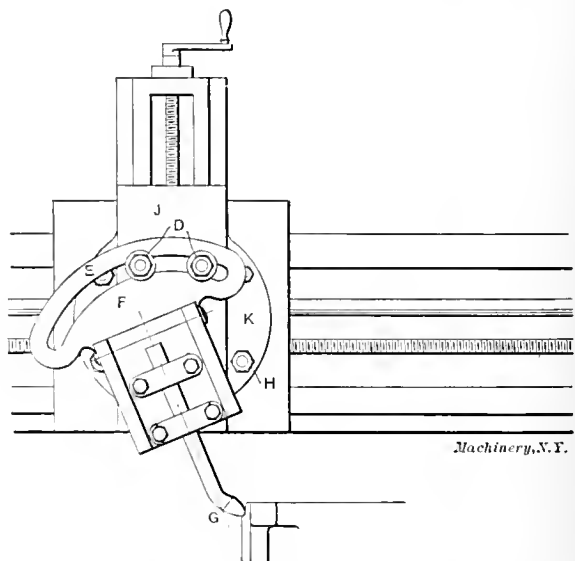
The Planer Tool-block set for Taking Vertical Cuts.
